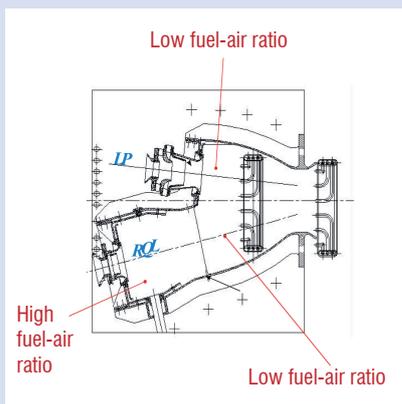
02 - Lengthwise section of a two-head LPP-RQL combustor
